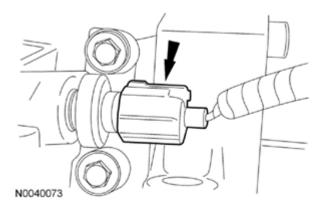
Locating Engine Oil Pressure Switch Electrical Connector Courtesy of FORD MOTOR CO.
